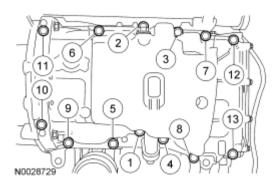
Identifying Rear Oil Pan Bolts Courtesy of FORD MOTOR CO.
